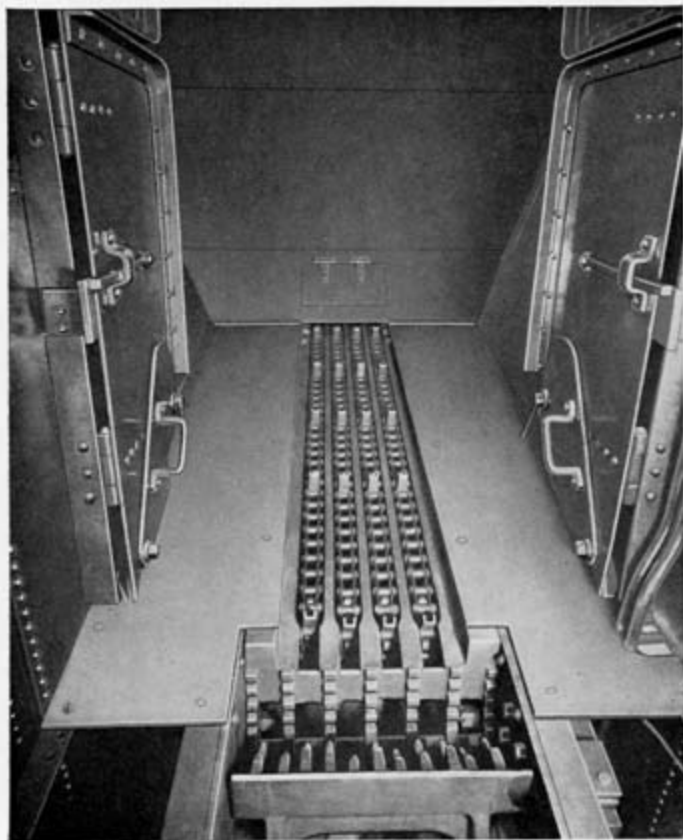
View in tank with front deck plate removed to more clearly show the crusher
